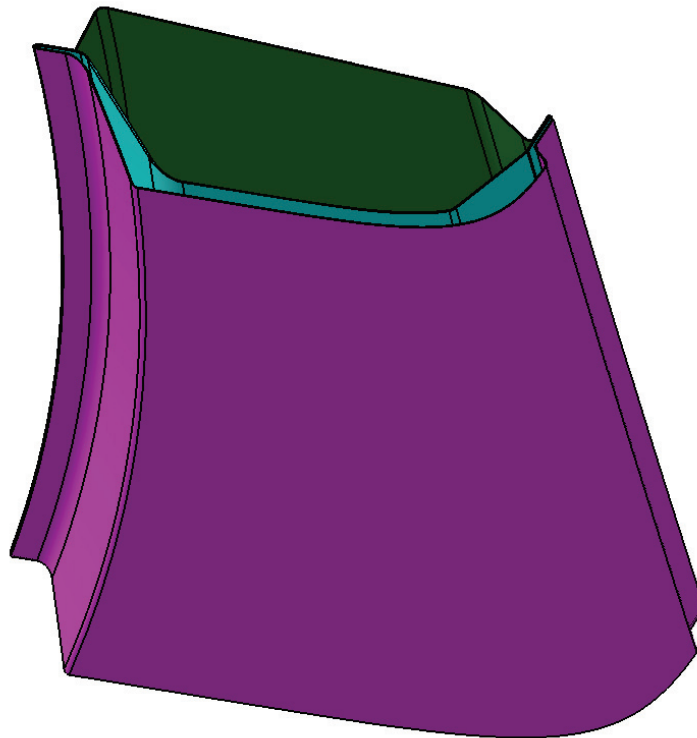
Example zone C-pillar, upper with door bedding on the left and window bedding on the right
